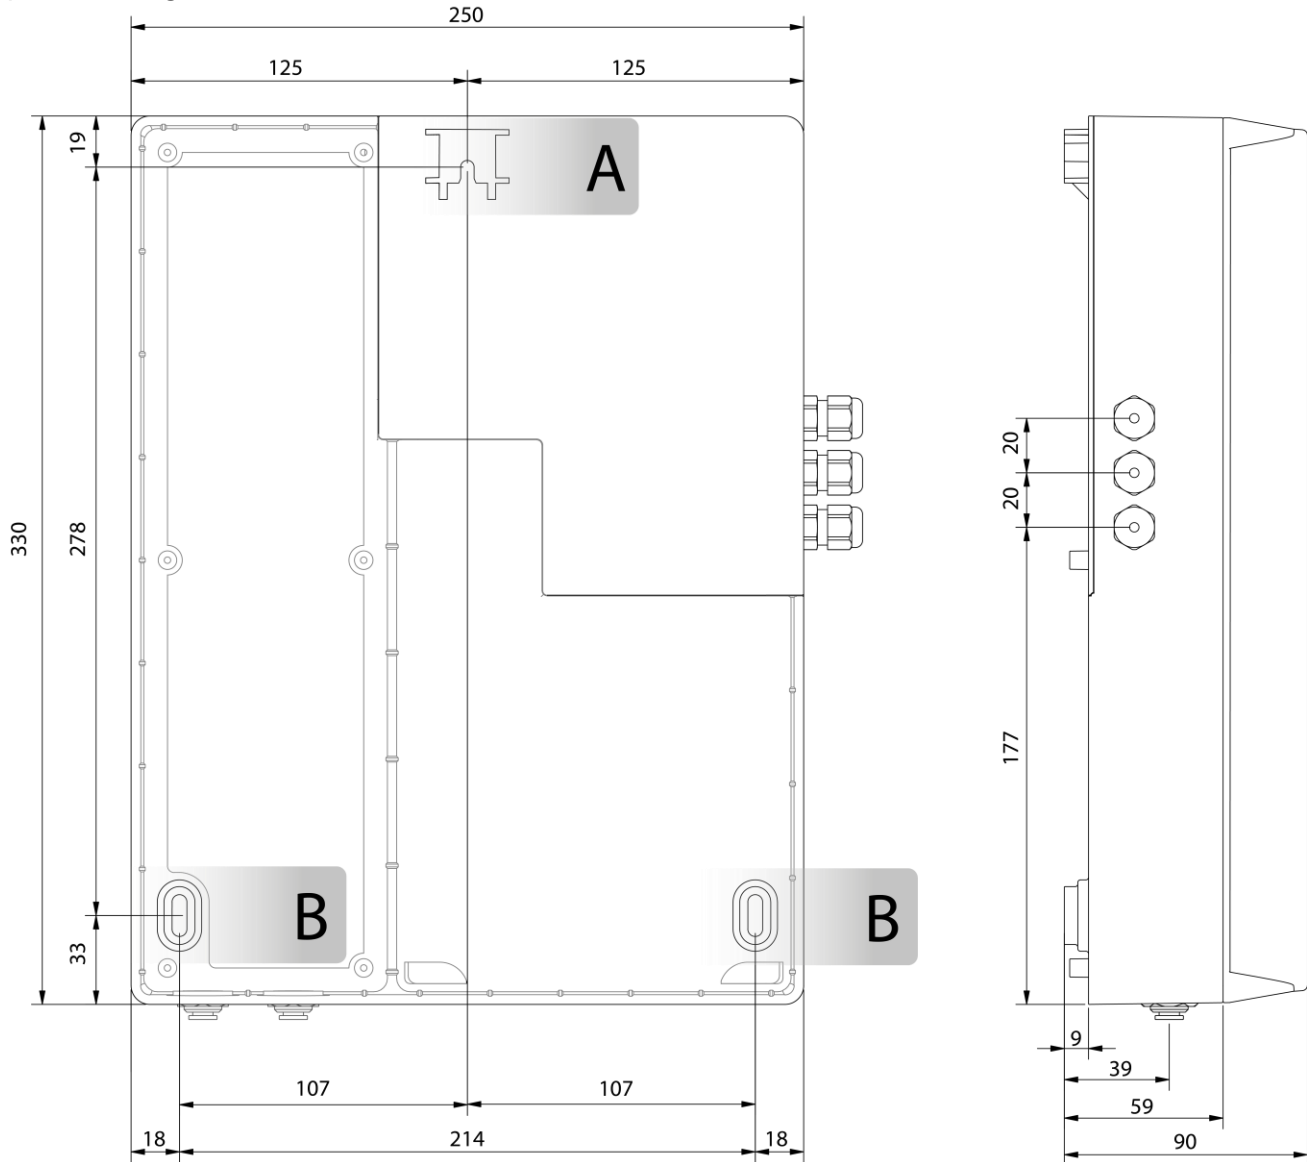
LIMES - rear and side view (dimensions are in mm)
